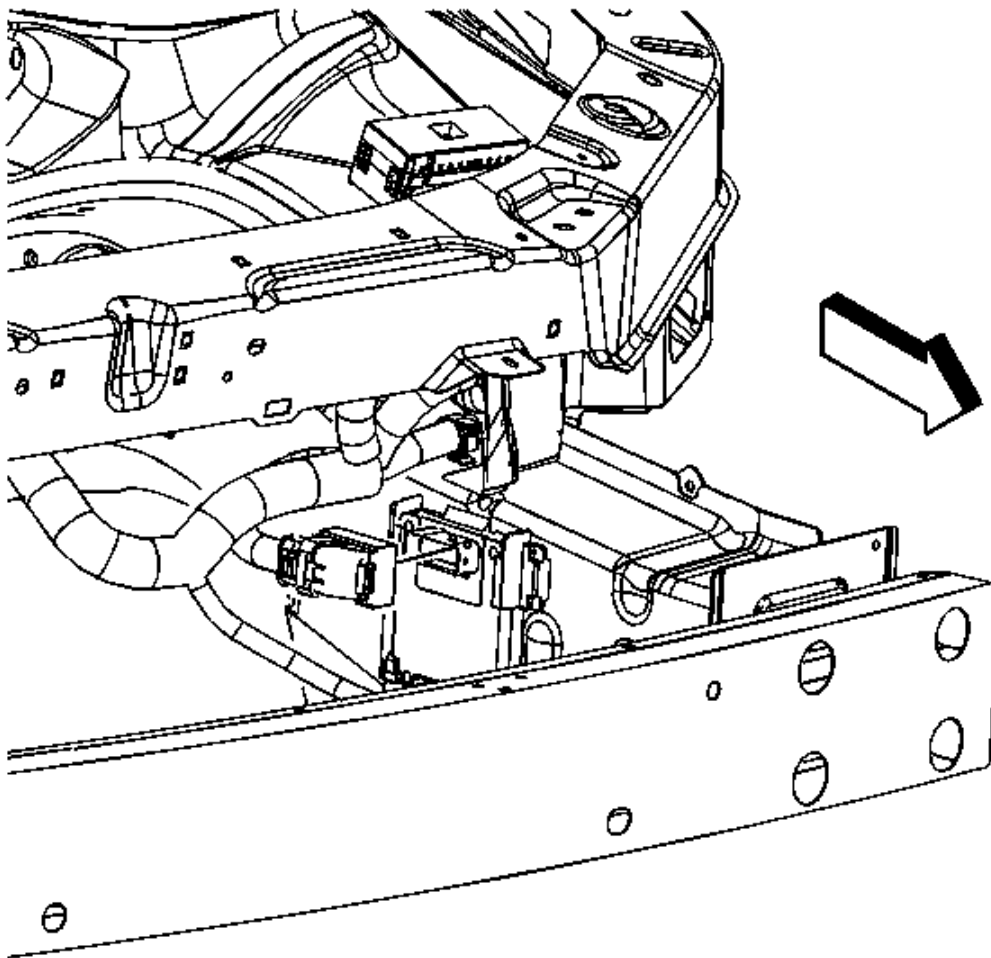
Transmission Control Module (TCM) Engine Harness Electrical Connector
